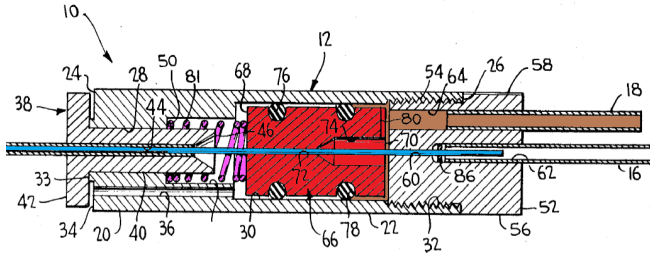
Schematic drawing of a piston based mechanism. Relevant components: 16 = vacuum supply tube, 18 = pressurized air supply tube, 44 = inner cutting tube, 76 = distal O-ring, 78 = proximal O-ring, 81 = compression spring, Adapted from: [47]
